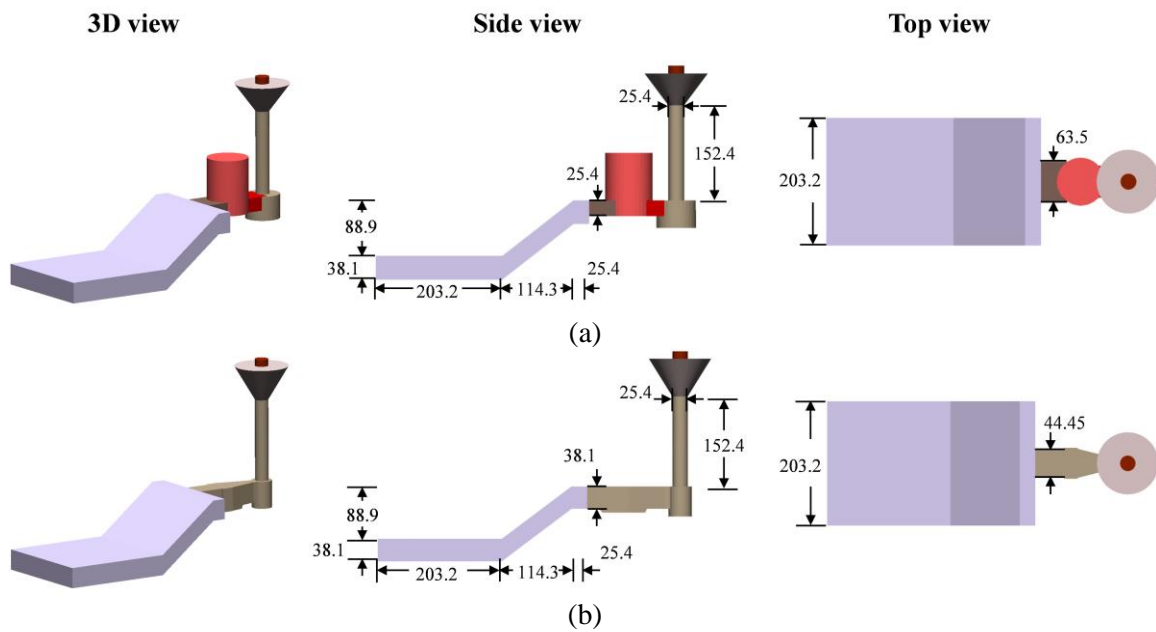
Geometry of casting with inclined surface (a) with riser, and (b) without riser. All dimensions in mm.
